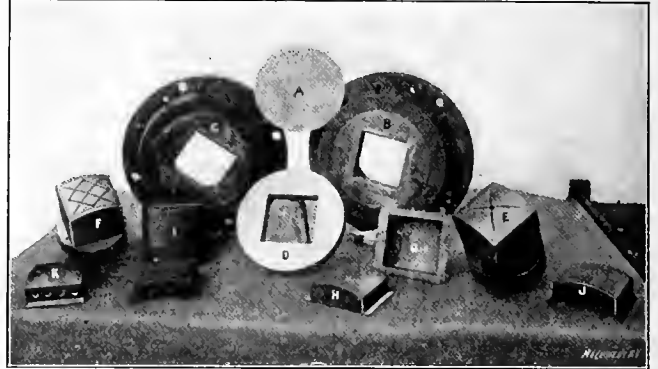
Punches and Dies for Rectangular Lamp-hoods and the Stock Before and After the Drawing Operations
